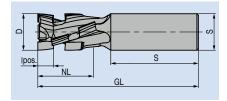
LH-RD negative twist, workpiece face side to top, supports workpiece clamping.
